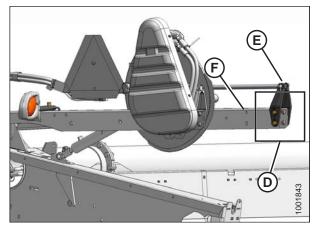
Right Reel Arm Cylinder in Forward Position
